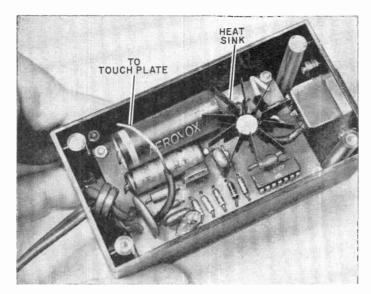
Heat sink slips onto Q1's case; bare wire end goes to cabinet's metal cover plate.
